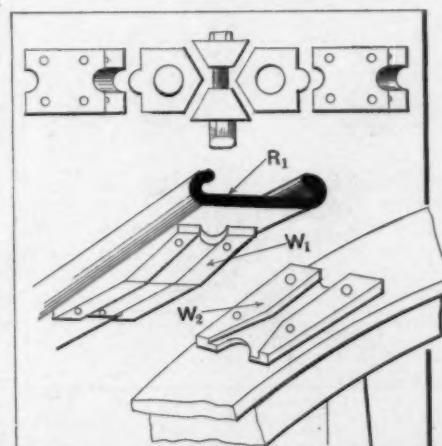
Denegre rim with a large clearance between the rim and the felloe band and method of fastening
